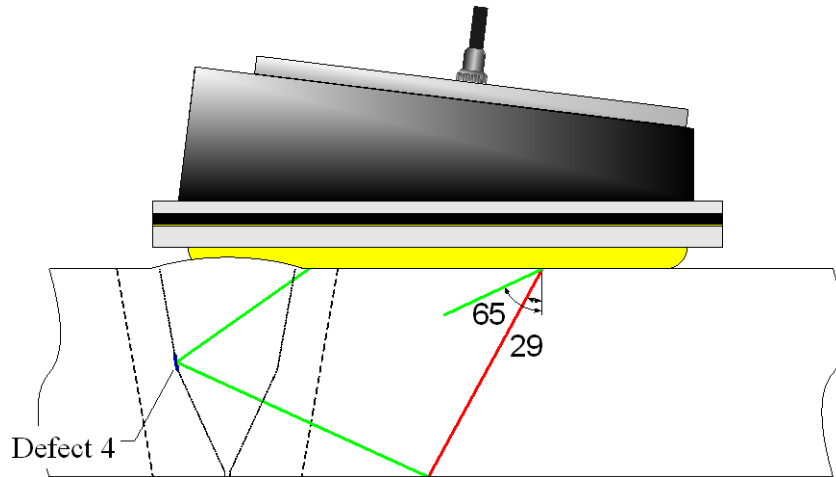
Schematic diagram of the through weld 65° longitudinal wave TLL inspection set for the inspection of defect 4.
